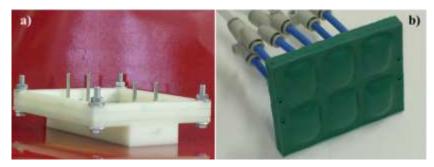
Prototyping of the actuator: a) the casting mold; b) the final prototype
